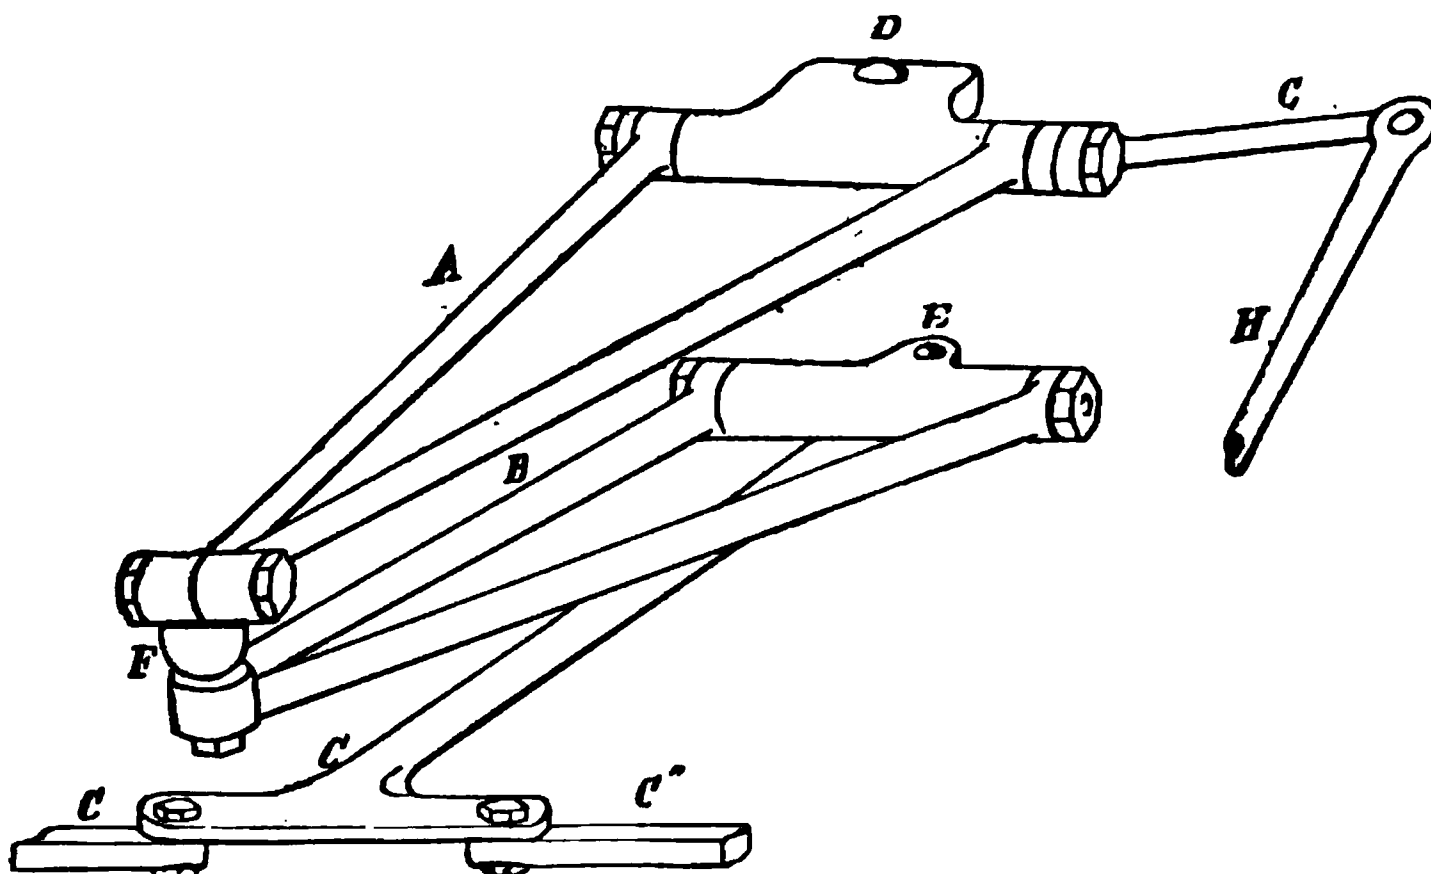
The De Dion & Bouton Spring Compensating Steering Device. The V-shaped piece A, constructed of two pieces, as shown, is attached to the tubular front cross-piece of the body frame at D, and pivoted on the ball joint at F, to the lower V-shaped piece, B. This is also pivoted at F, and is attached to the axletree at E. The T-piece, C, is also pivoted at E rigidly with B, so as to turn sideways with it. It carries the links C' and C'', which actuate the steering arms of the two stud axles. The link, H, is attached to the arm, G, and when moved forward or back by the worm gear and pinion arrangement at the base of the steering-wheel pillar, moves the entire structure, A, B and C, on the pivots, D and E, to the right or left, as desired. The object of the device is to allow of a certain up and down movement, as the springs yield, without disarranging the steering gear or vibrating the steer wheel. In such cases the V-pieces, A and B, move on the ball joint F, thus permitting the points, D and E, to be approached and separated, as the springs move.
